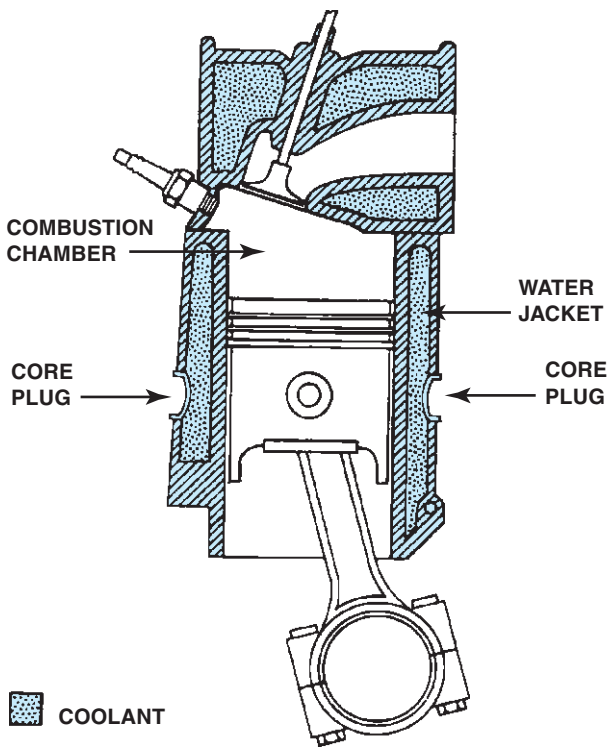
Coolant circulates through the water jackets in the engine block and cylinder head.
